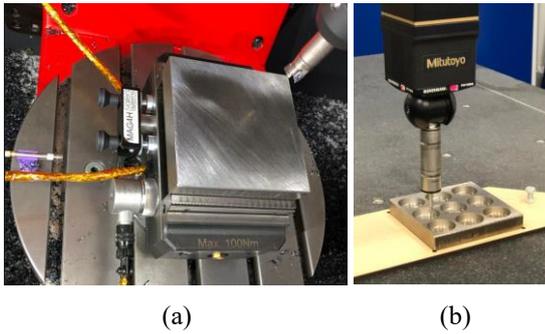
(a) CNC machining; (b) CMM inspection.
